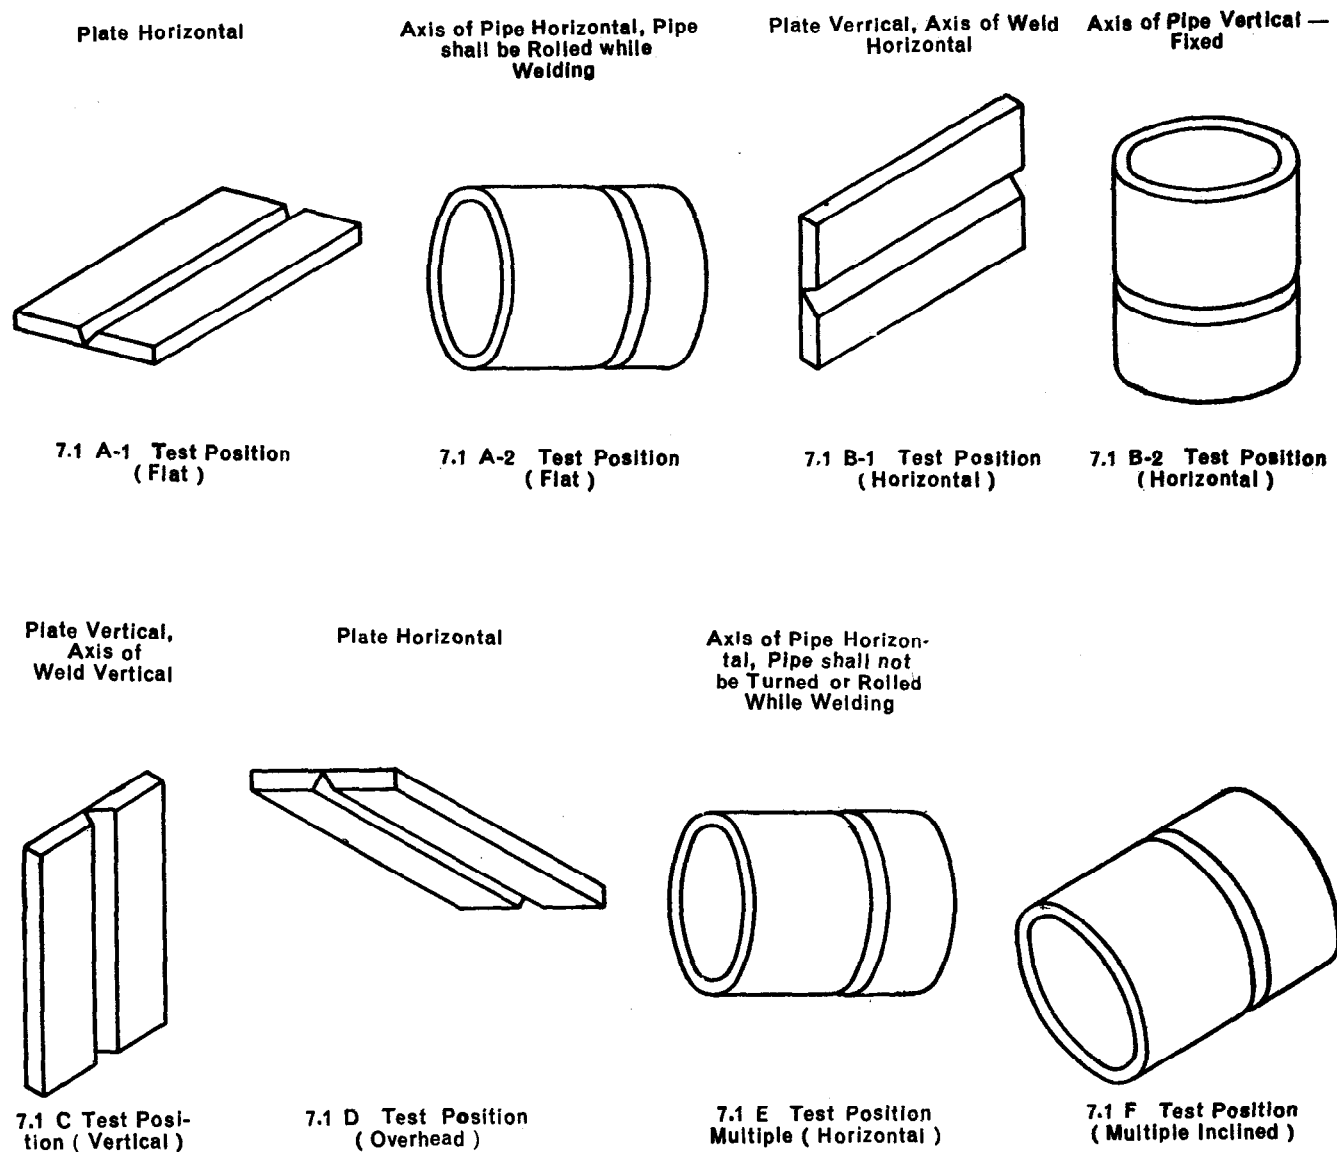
POSITIONS OF TEST PLATES OR PIPES FOR WELDER QUALIFICATION AND PERFORMANCE OF BUTT WELDS
